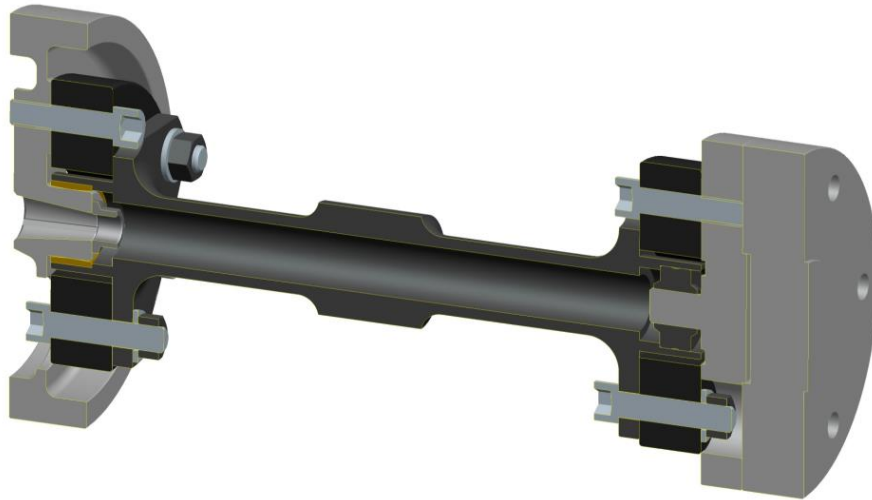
SOLID MODEL SECTIONAL VIEW OF THE NEW TORSIONAL DRIVESHAFT.
